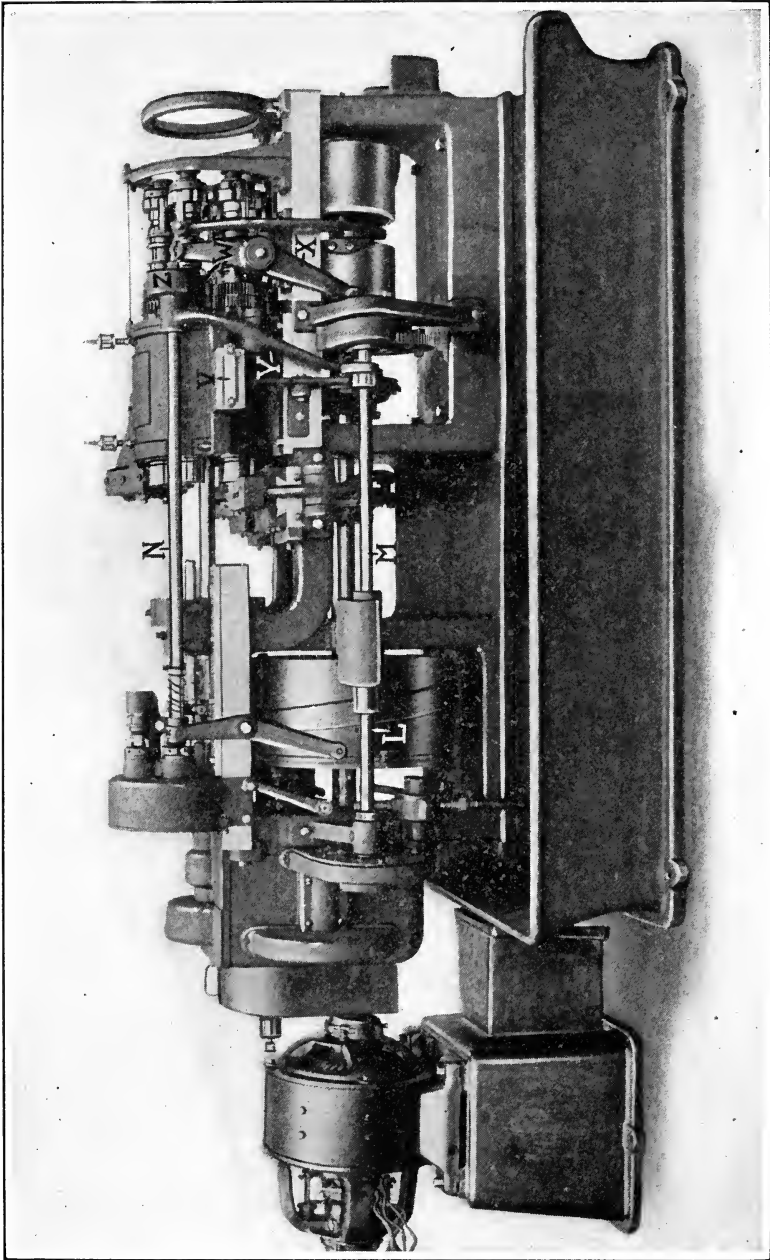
Rear View of Motor-driven New Britain, Six-spindle Automatic
